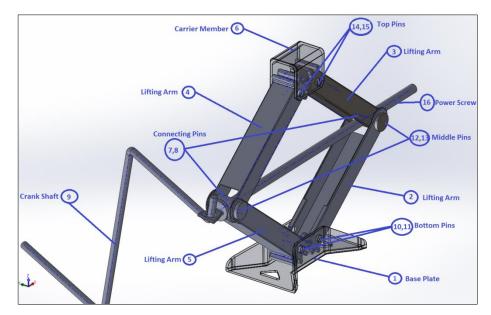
Assembly drawing of scissor jack (Bariskan, 2014)
